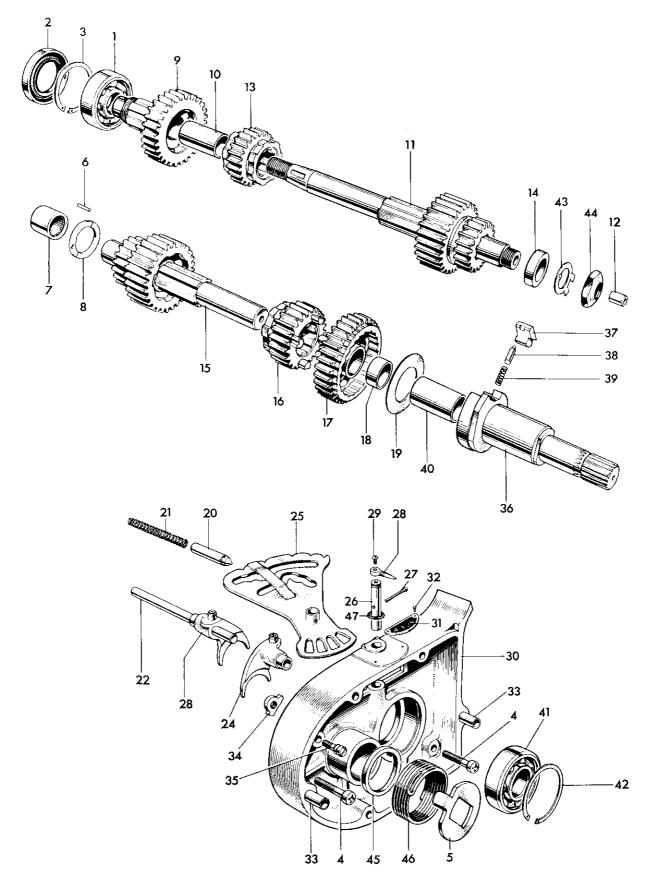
GEARBOX SHAFTS, BEARINGS AND INNER COVER
